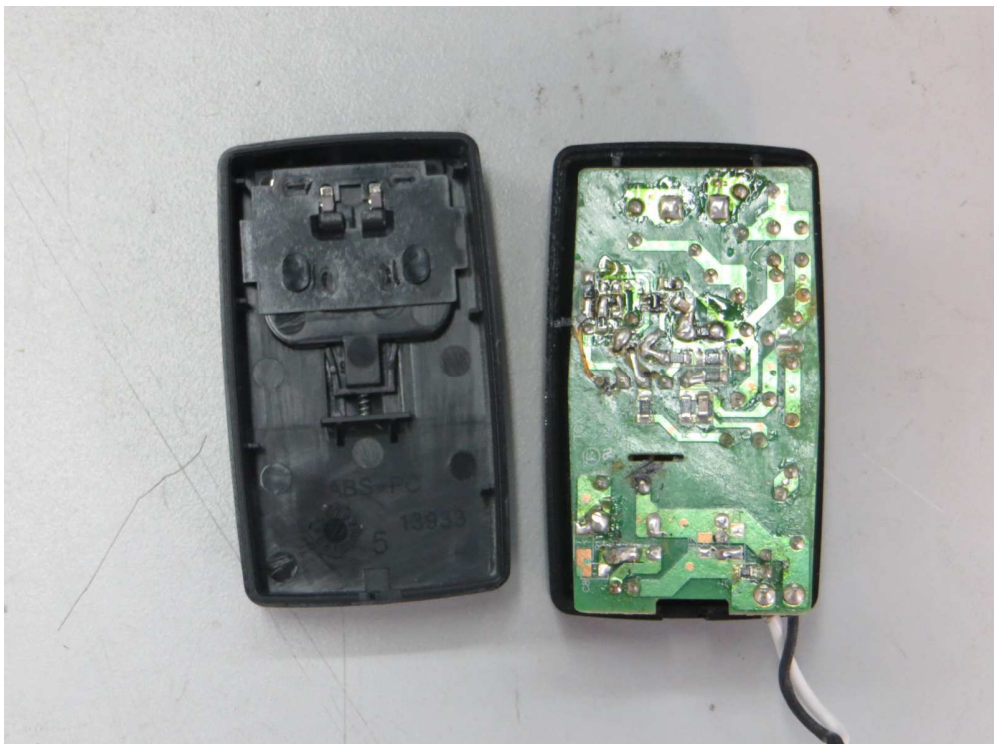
PCB view for the structure type only use F1 and a LED indicator (optional)
